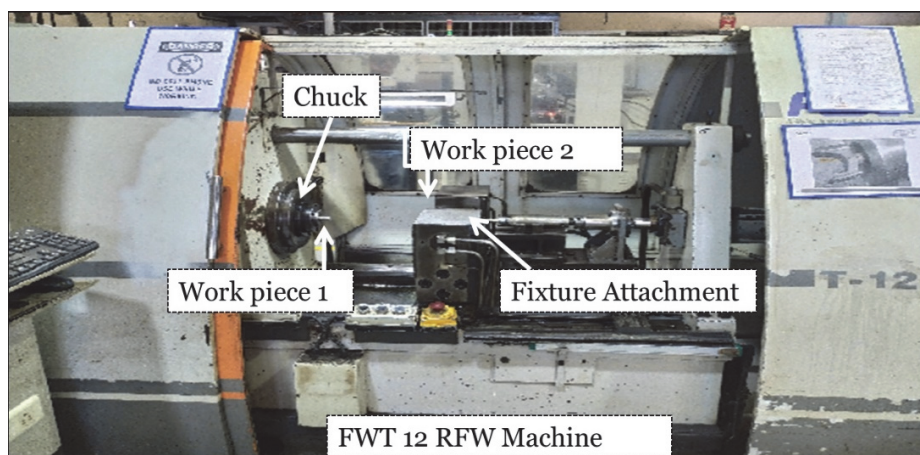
Experimental set up (Rotary Friction Welding Machine) FT 12.
